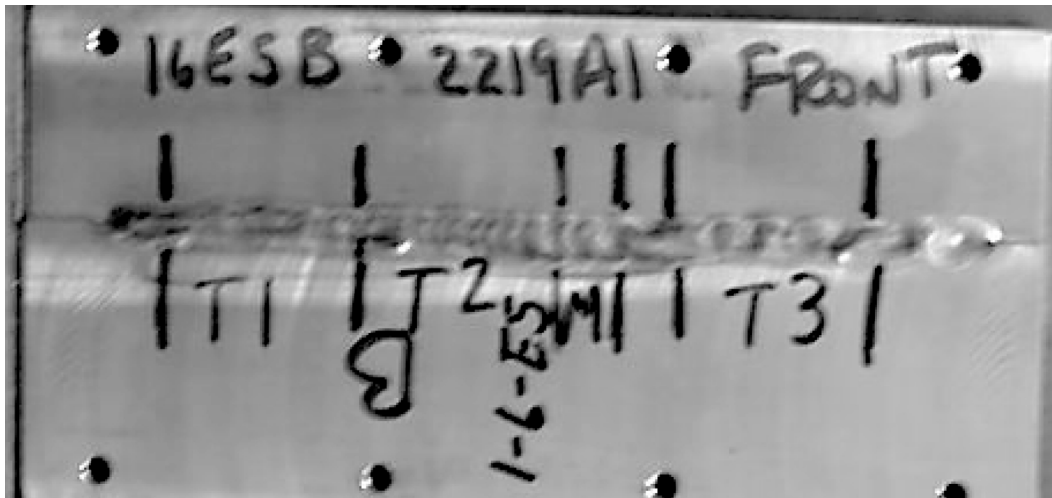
Al 2219 fillet weld (sample 1-6-E-5B).
